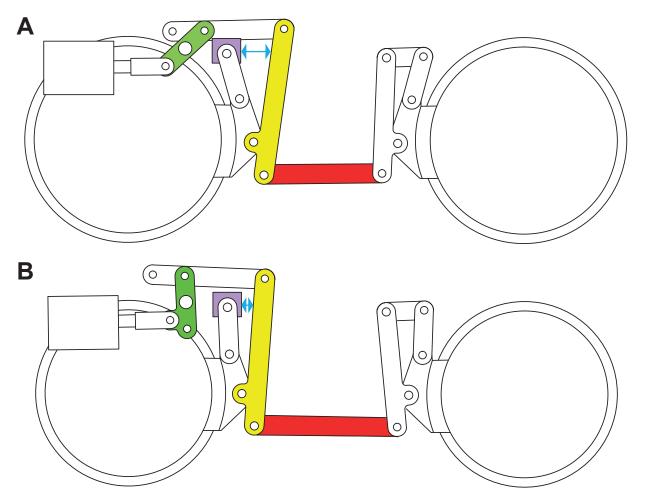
Diagram of the geometry of the brake mechanism when a) built to the original design; and b) the brake cylinder attachment position had been altered and the wheels have worn. The link altered by the railway is highlighted in green, the adjustable turnbuckle link in red and the clearance by the blue arrow.
